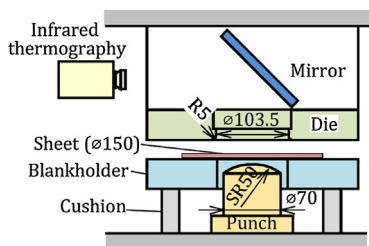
Equipment for hot deep drawing with hemispherical cylinder punch.
